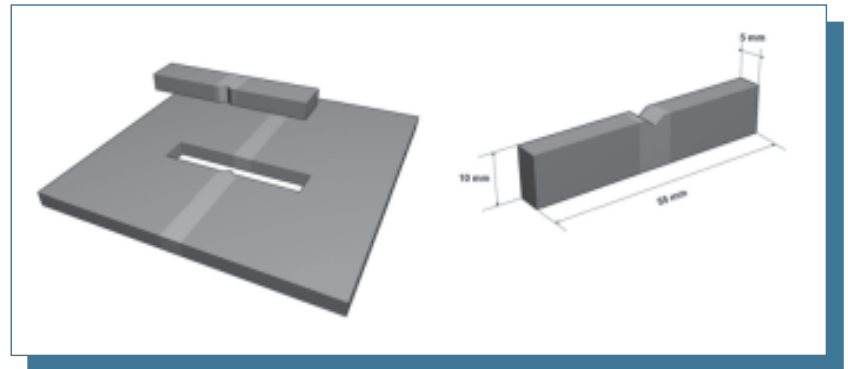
Scheme of the machining of the Charpy specimens from the FSW plates and dimensions of the sub-size specimens used for the tests.
